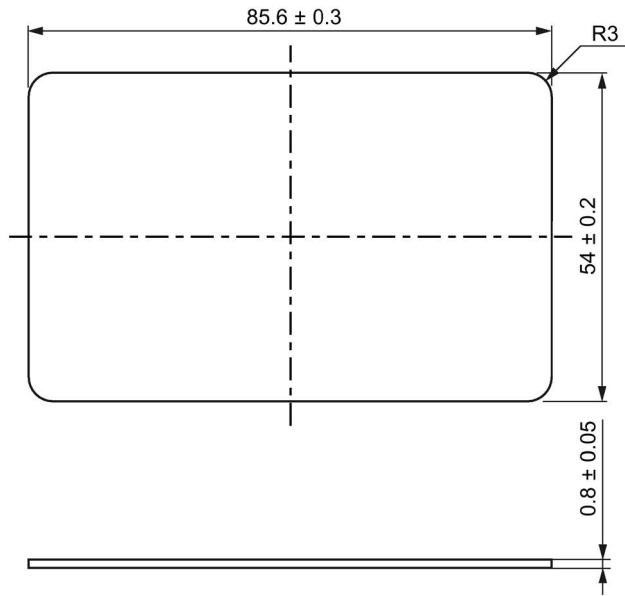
Dimensional drawing MDS D400 (dimensions in mm)
